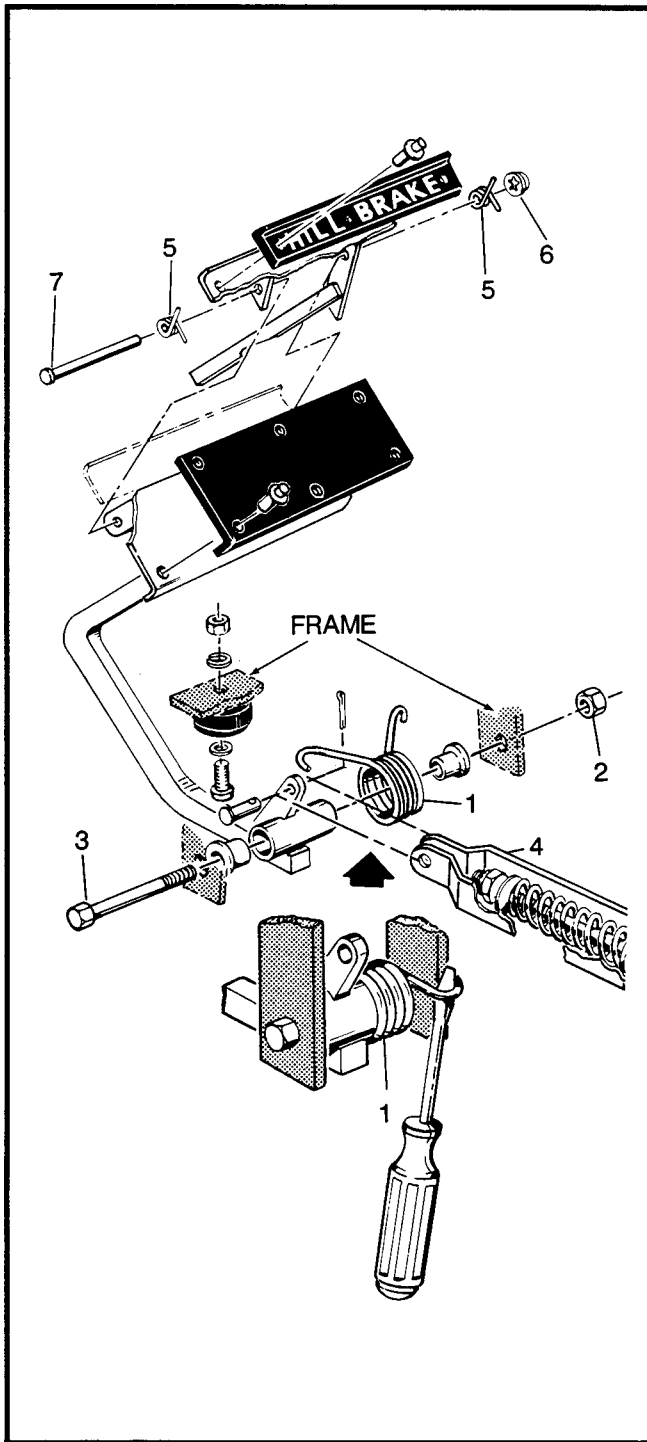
BRAKE PEDAL SPRING REMOVAL
